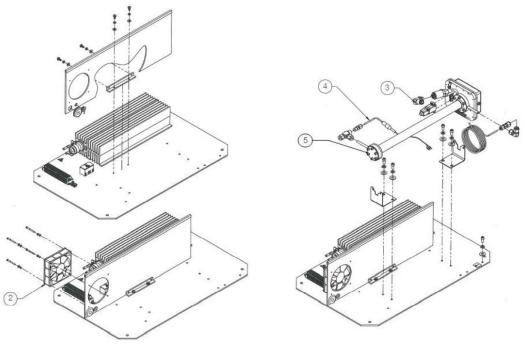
0.8 m sample cell panel assembly parts (Continued)
